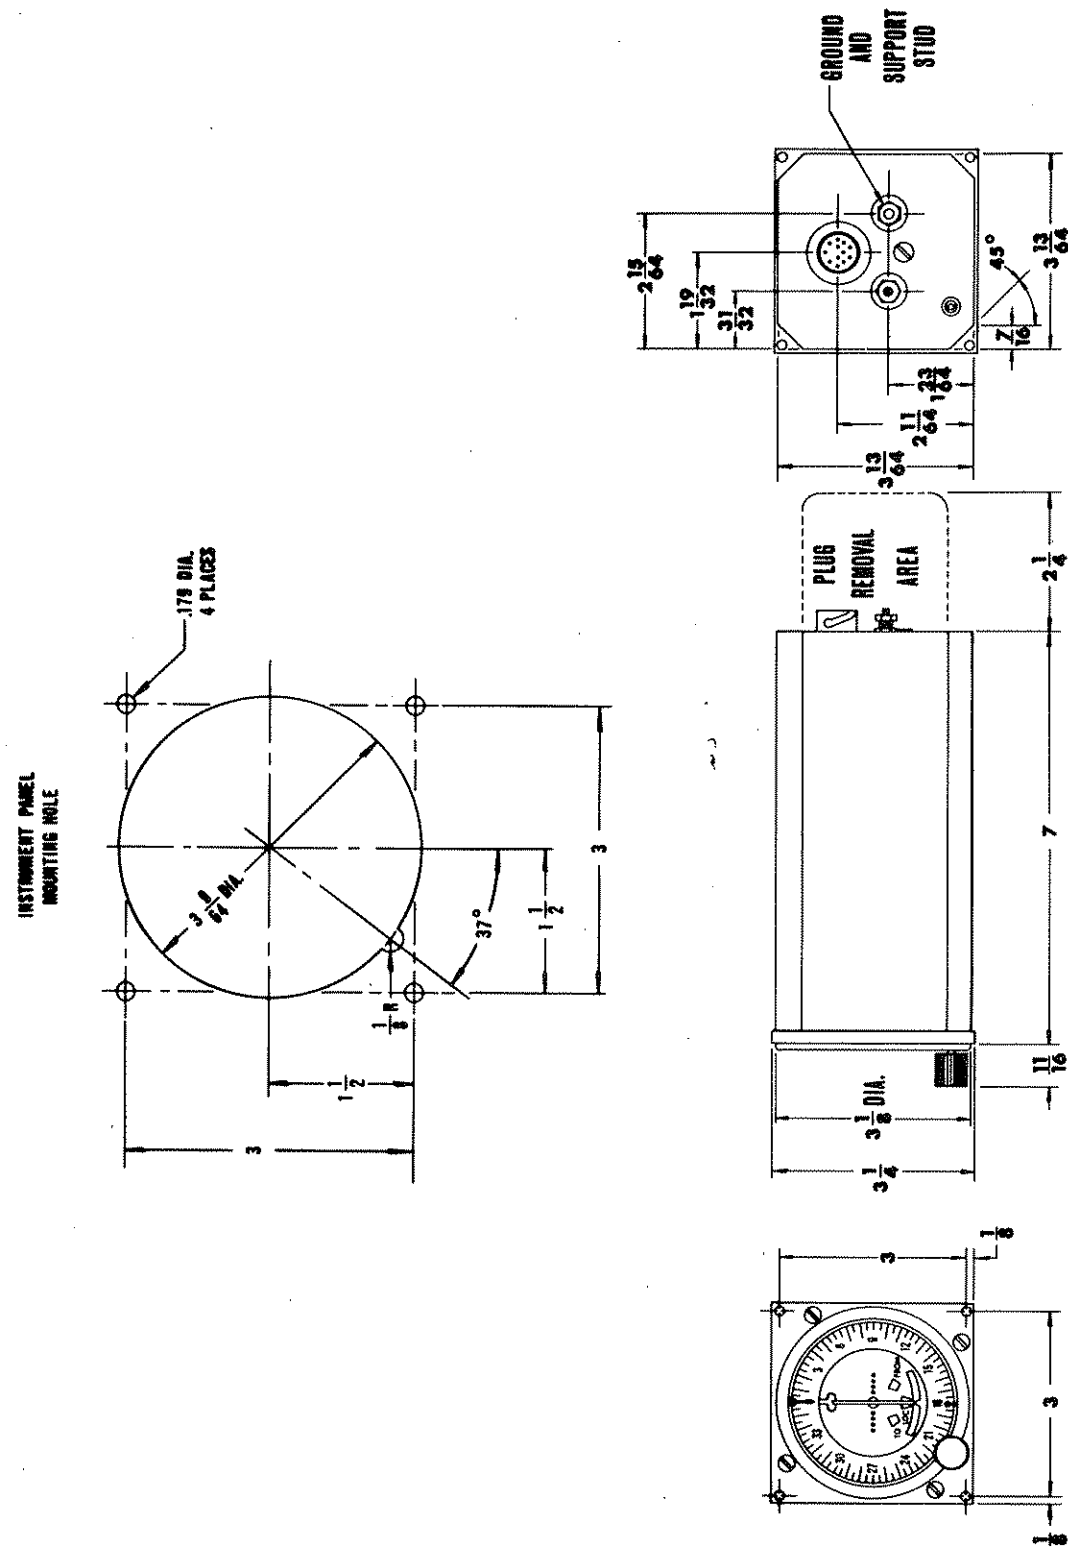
SAI 300 INSTALLATION DIMENSIONS AND PANEL CUT OUT
